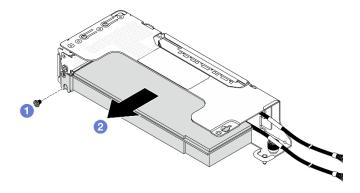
Removing a PCIe adapter from the 2LP riser cage
